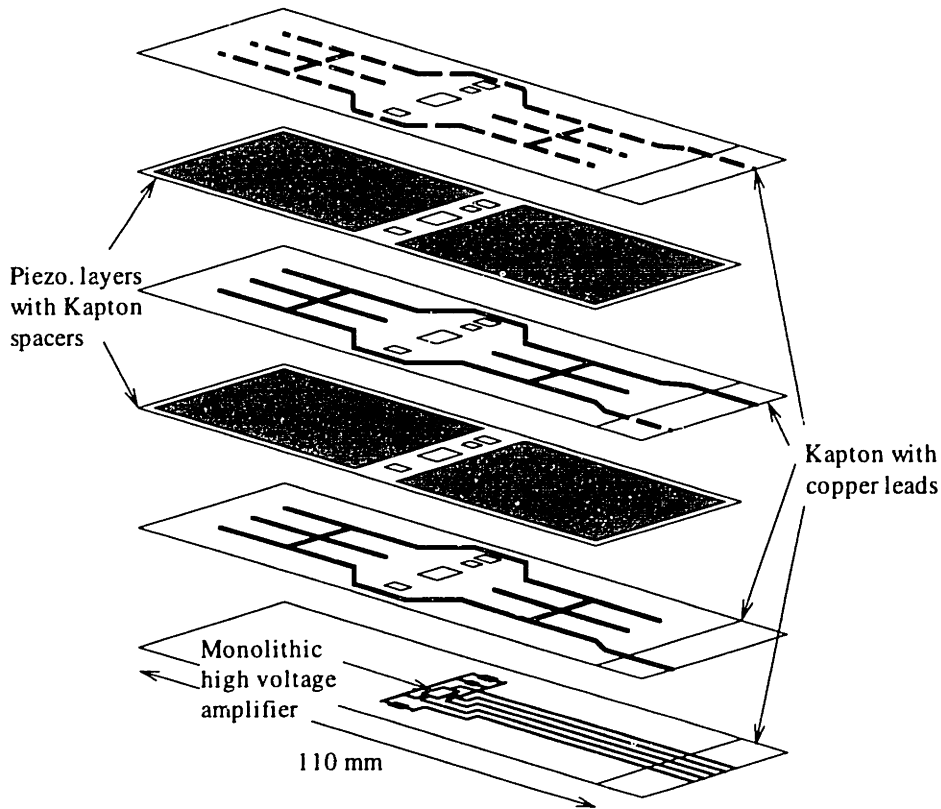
Exploded view of piezoelectric actuator package incorporating power amplification circuitry.
